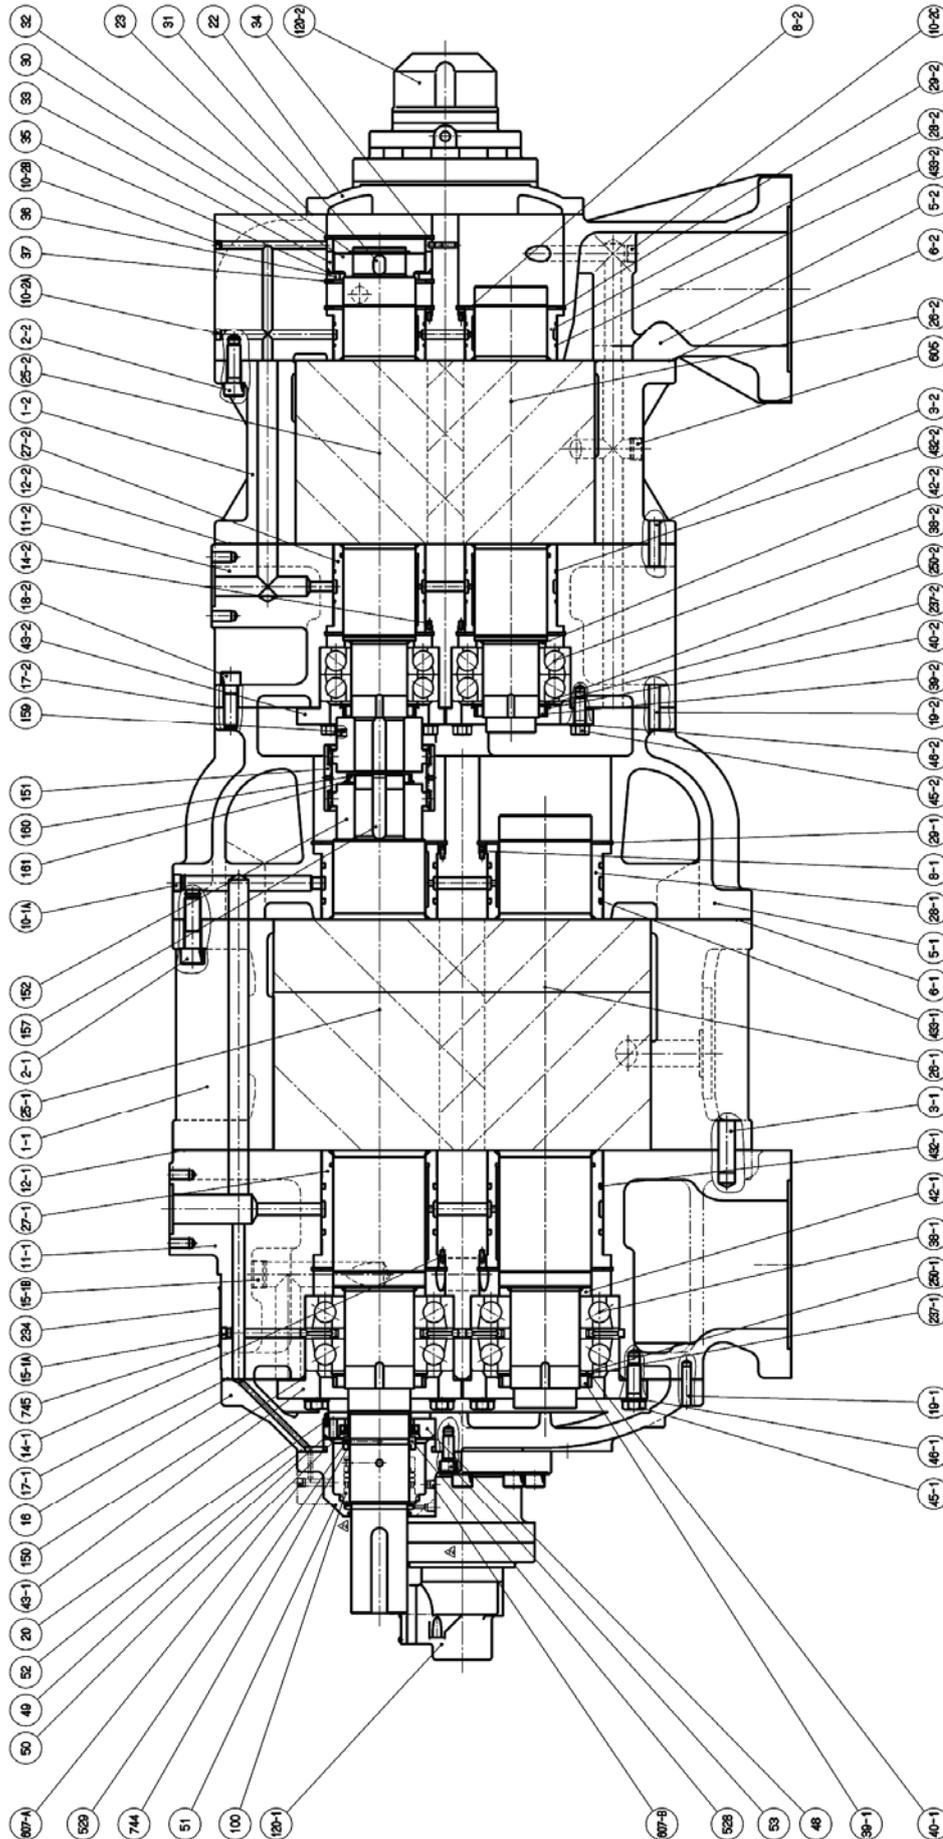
3225SSC Assembly Sectional View (Horizontal)
